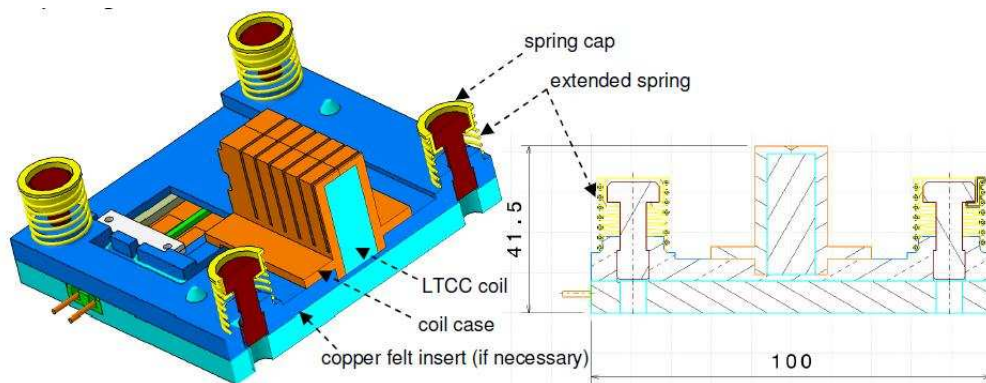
Cross section of pop-up threaded captivated M8 bolts and LTCC coil
